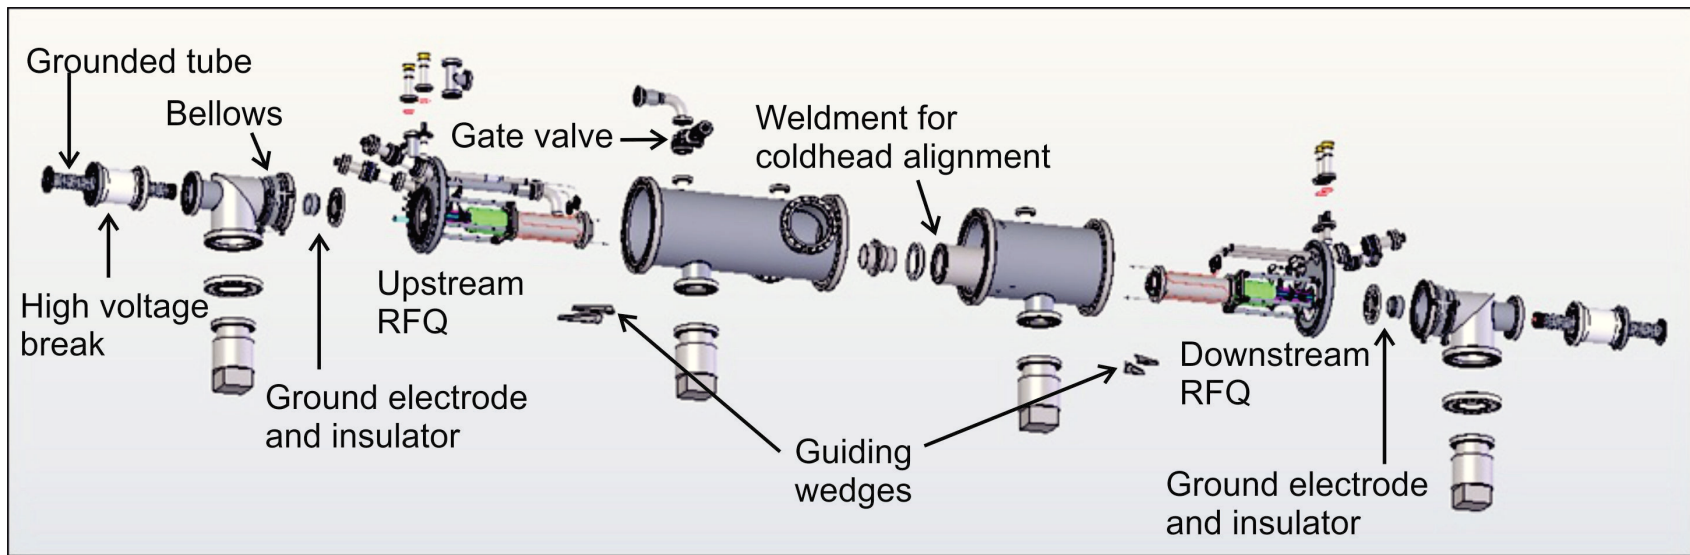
Exploded design view of BECOLA beam cooler and buncher. For ease of machining and assembly, the RFQ structure is split into upstream and downstream subassemblies, each of which are mounted to flanges at either end of the vacuum chamber.
